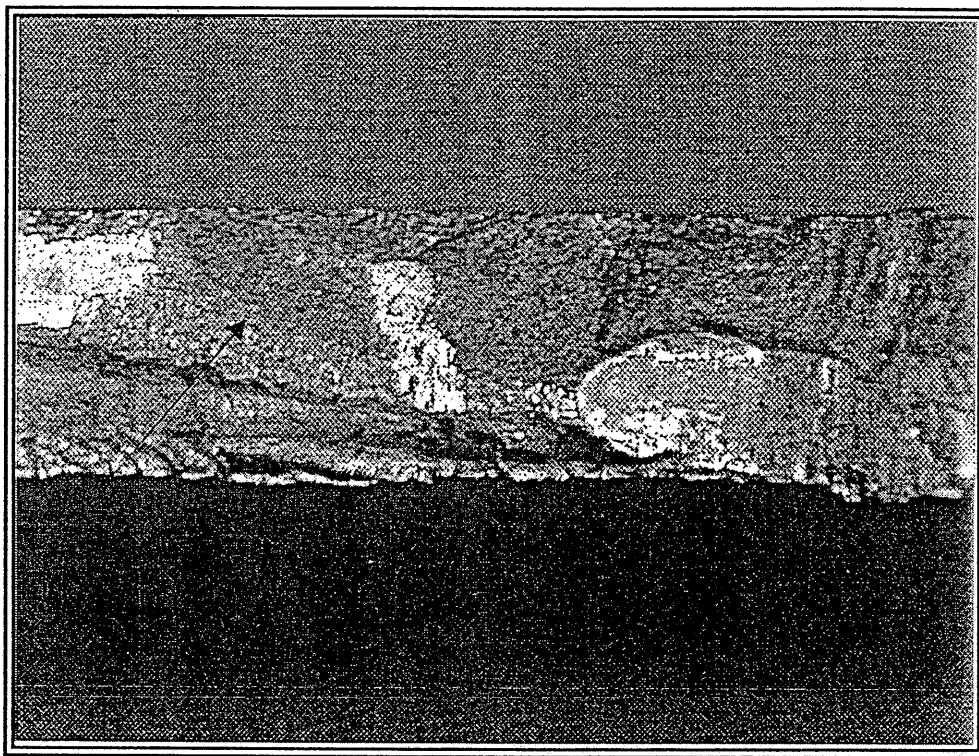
Photograph of the crack arrest lines on the fracture surface of the witch's hat flange section (arrow)
